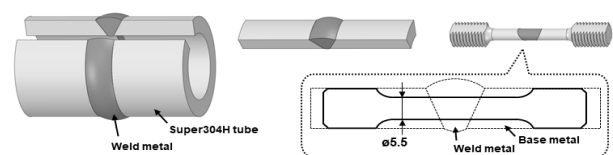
Schematic showing the locations of specimen collection in Super304H welded tube (Unit: mm)
